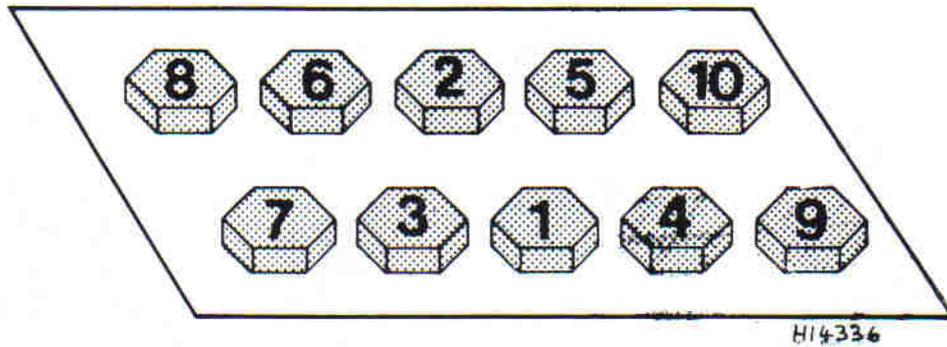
Cylinder head bolt tightening sequence – OHV engine (Sec 7)
